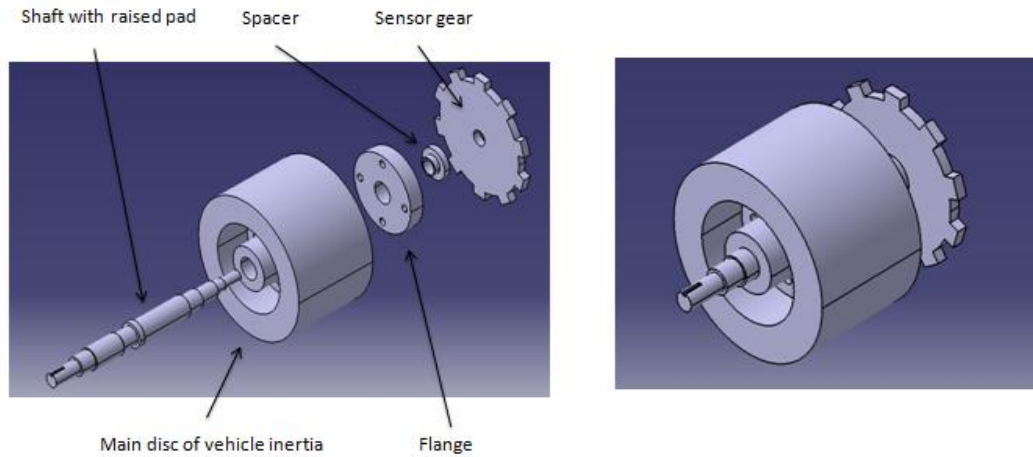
Main Disc, Shaft, Flange and Sensor Gear (Left); Assembled Vehicle Inertia Model (Right)
